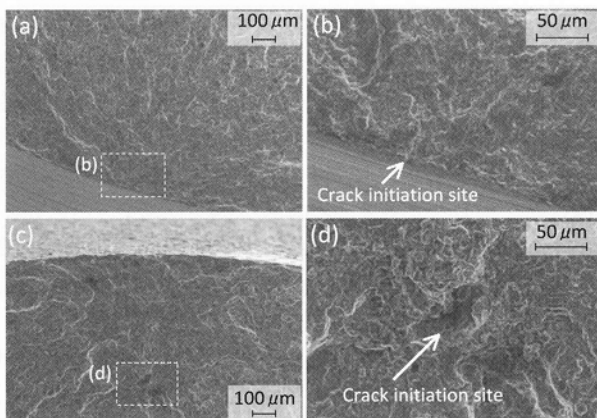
Fracture surfaces under rotating bending fatigue of material A: (a), (b) machined ($\sigma_a=145$ MPa, $N_f=919,000$ cycles) and (c), (d) FPB-treated ($\sigma_a=180$ MPa, $N_f=854,000$ cycles). (b) and (d) are magnified images of crack initiation sites in (a) and (c), respectively.
